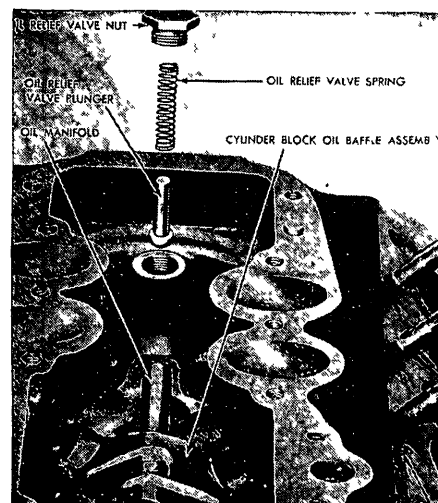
Oil pressure relief valve disassembled, 1935-48 V8
